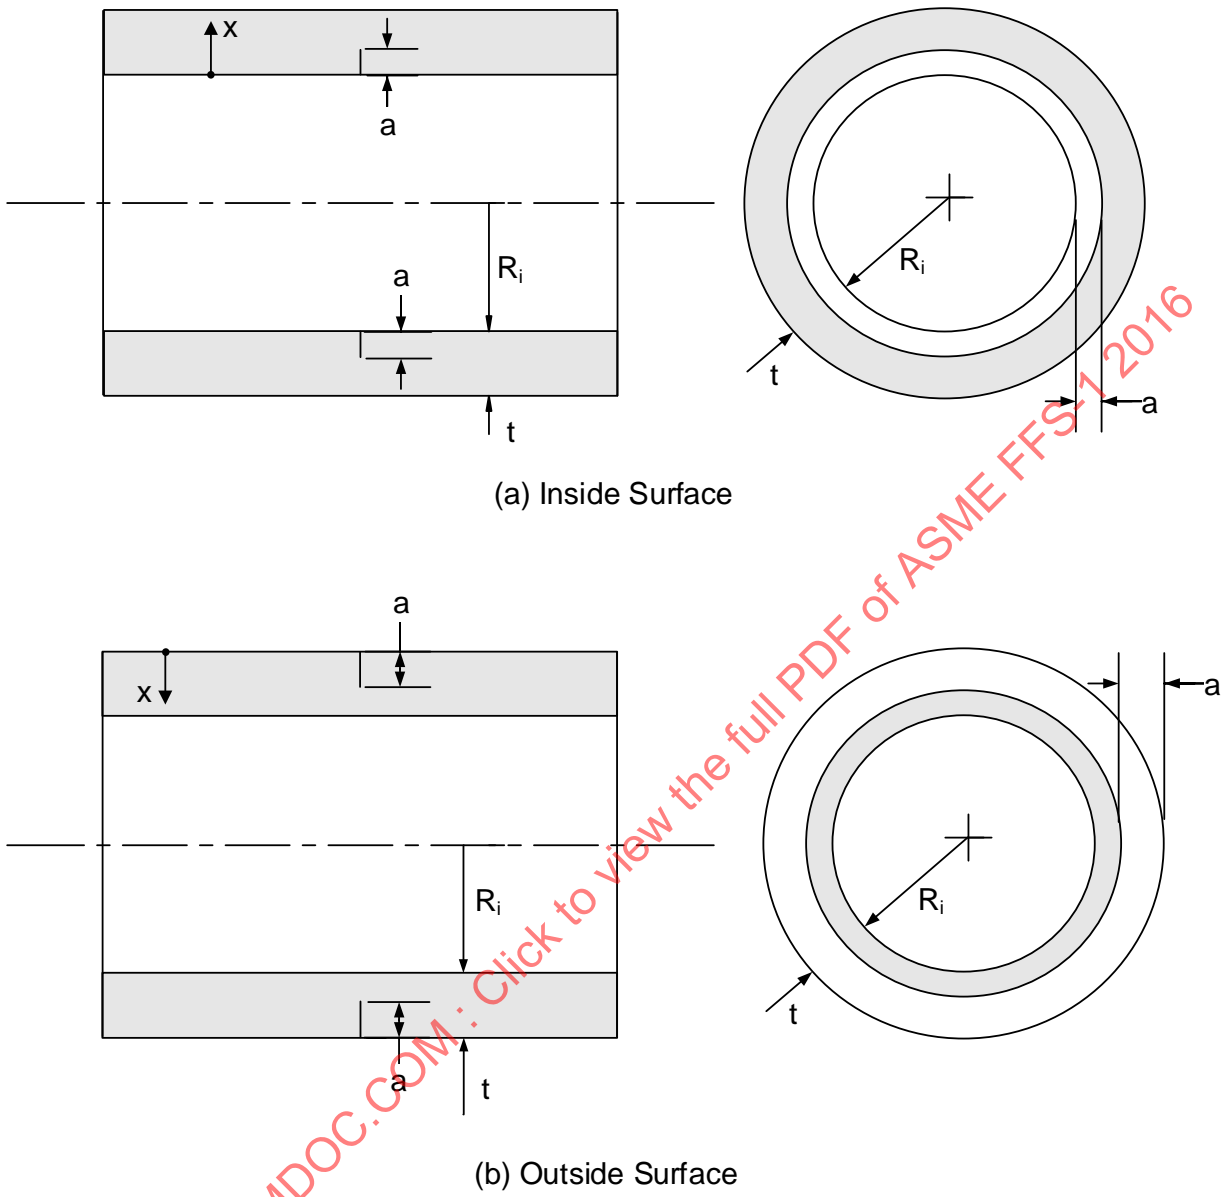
B.14 – Cylinder – Surface Crack, Circumferential Direction, 360 Degrees
